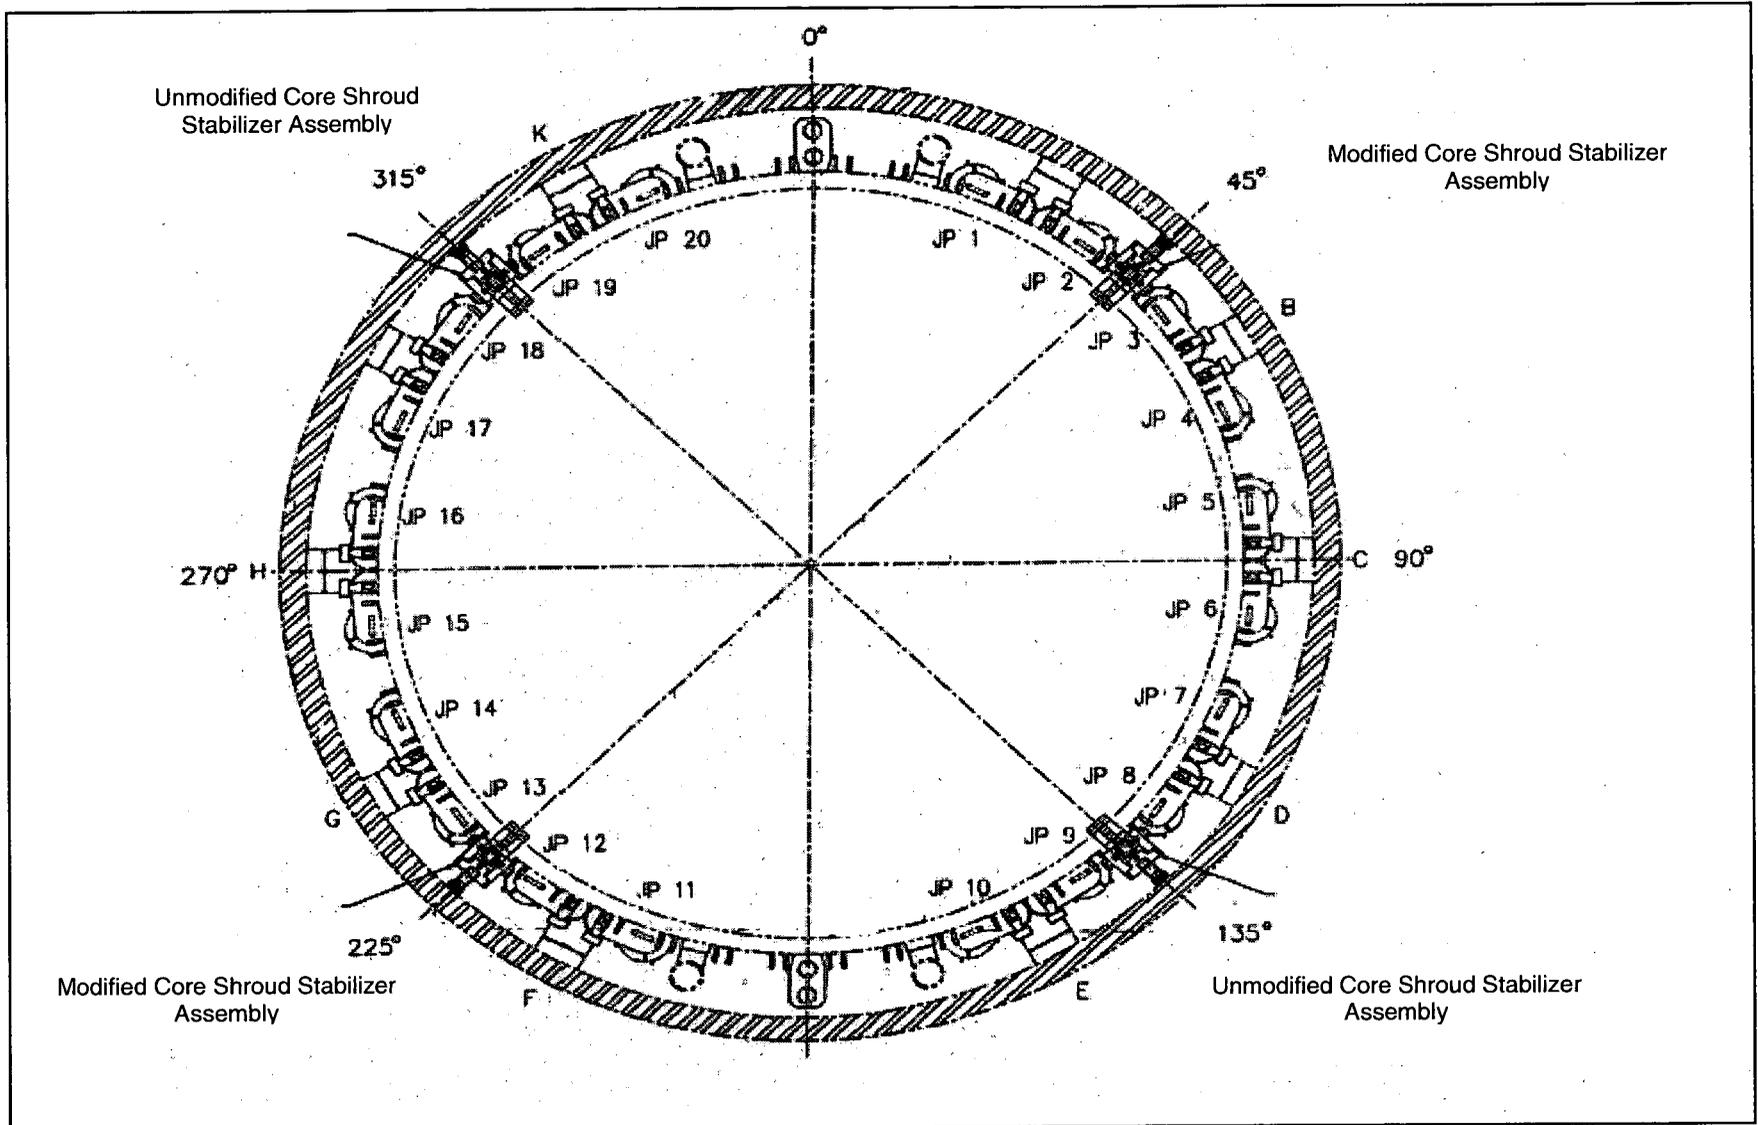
Locations of Core Shroud Stabilizer Assemblies
